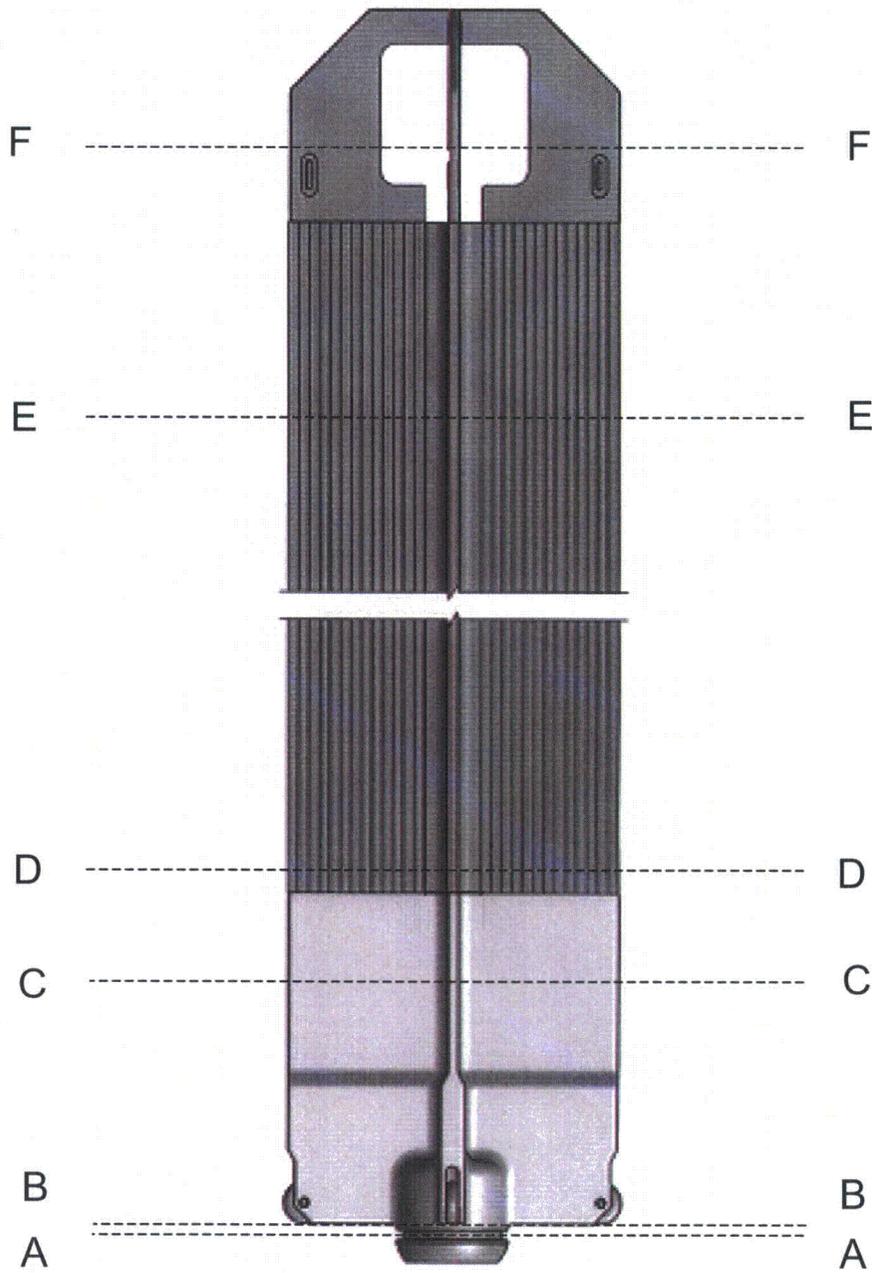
Control Rod Assembly Welds and Cross-Sections Analyzed for SCRAM
